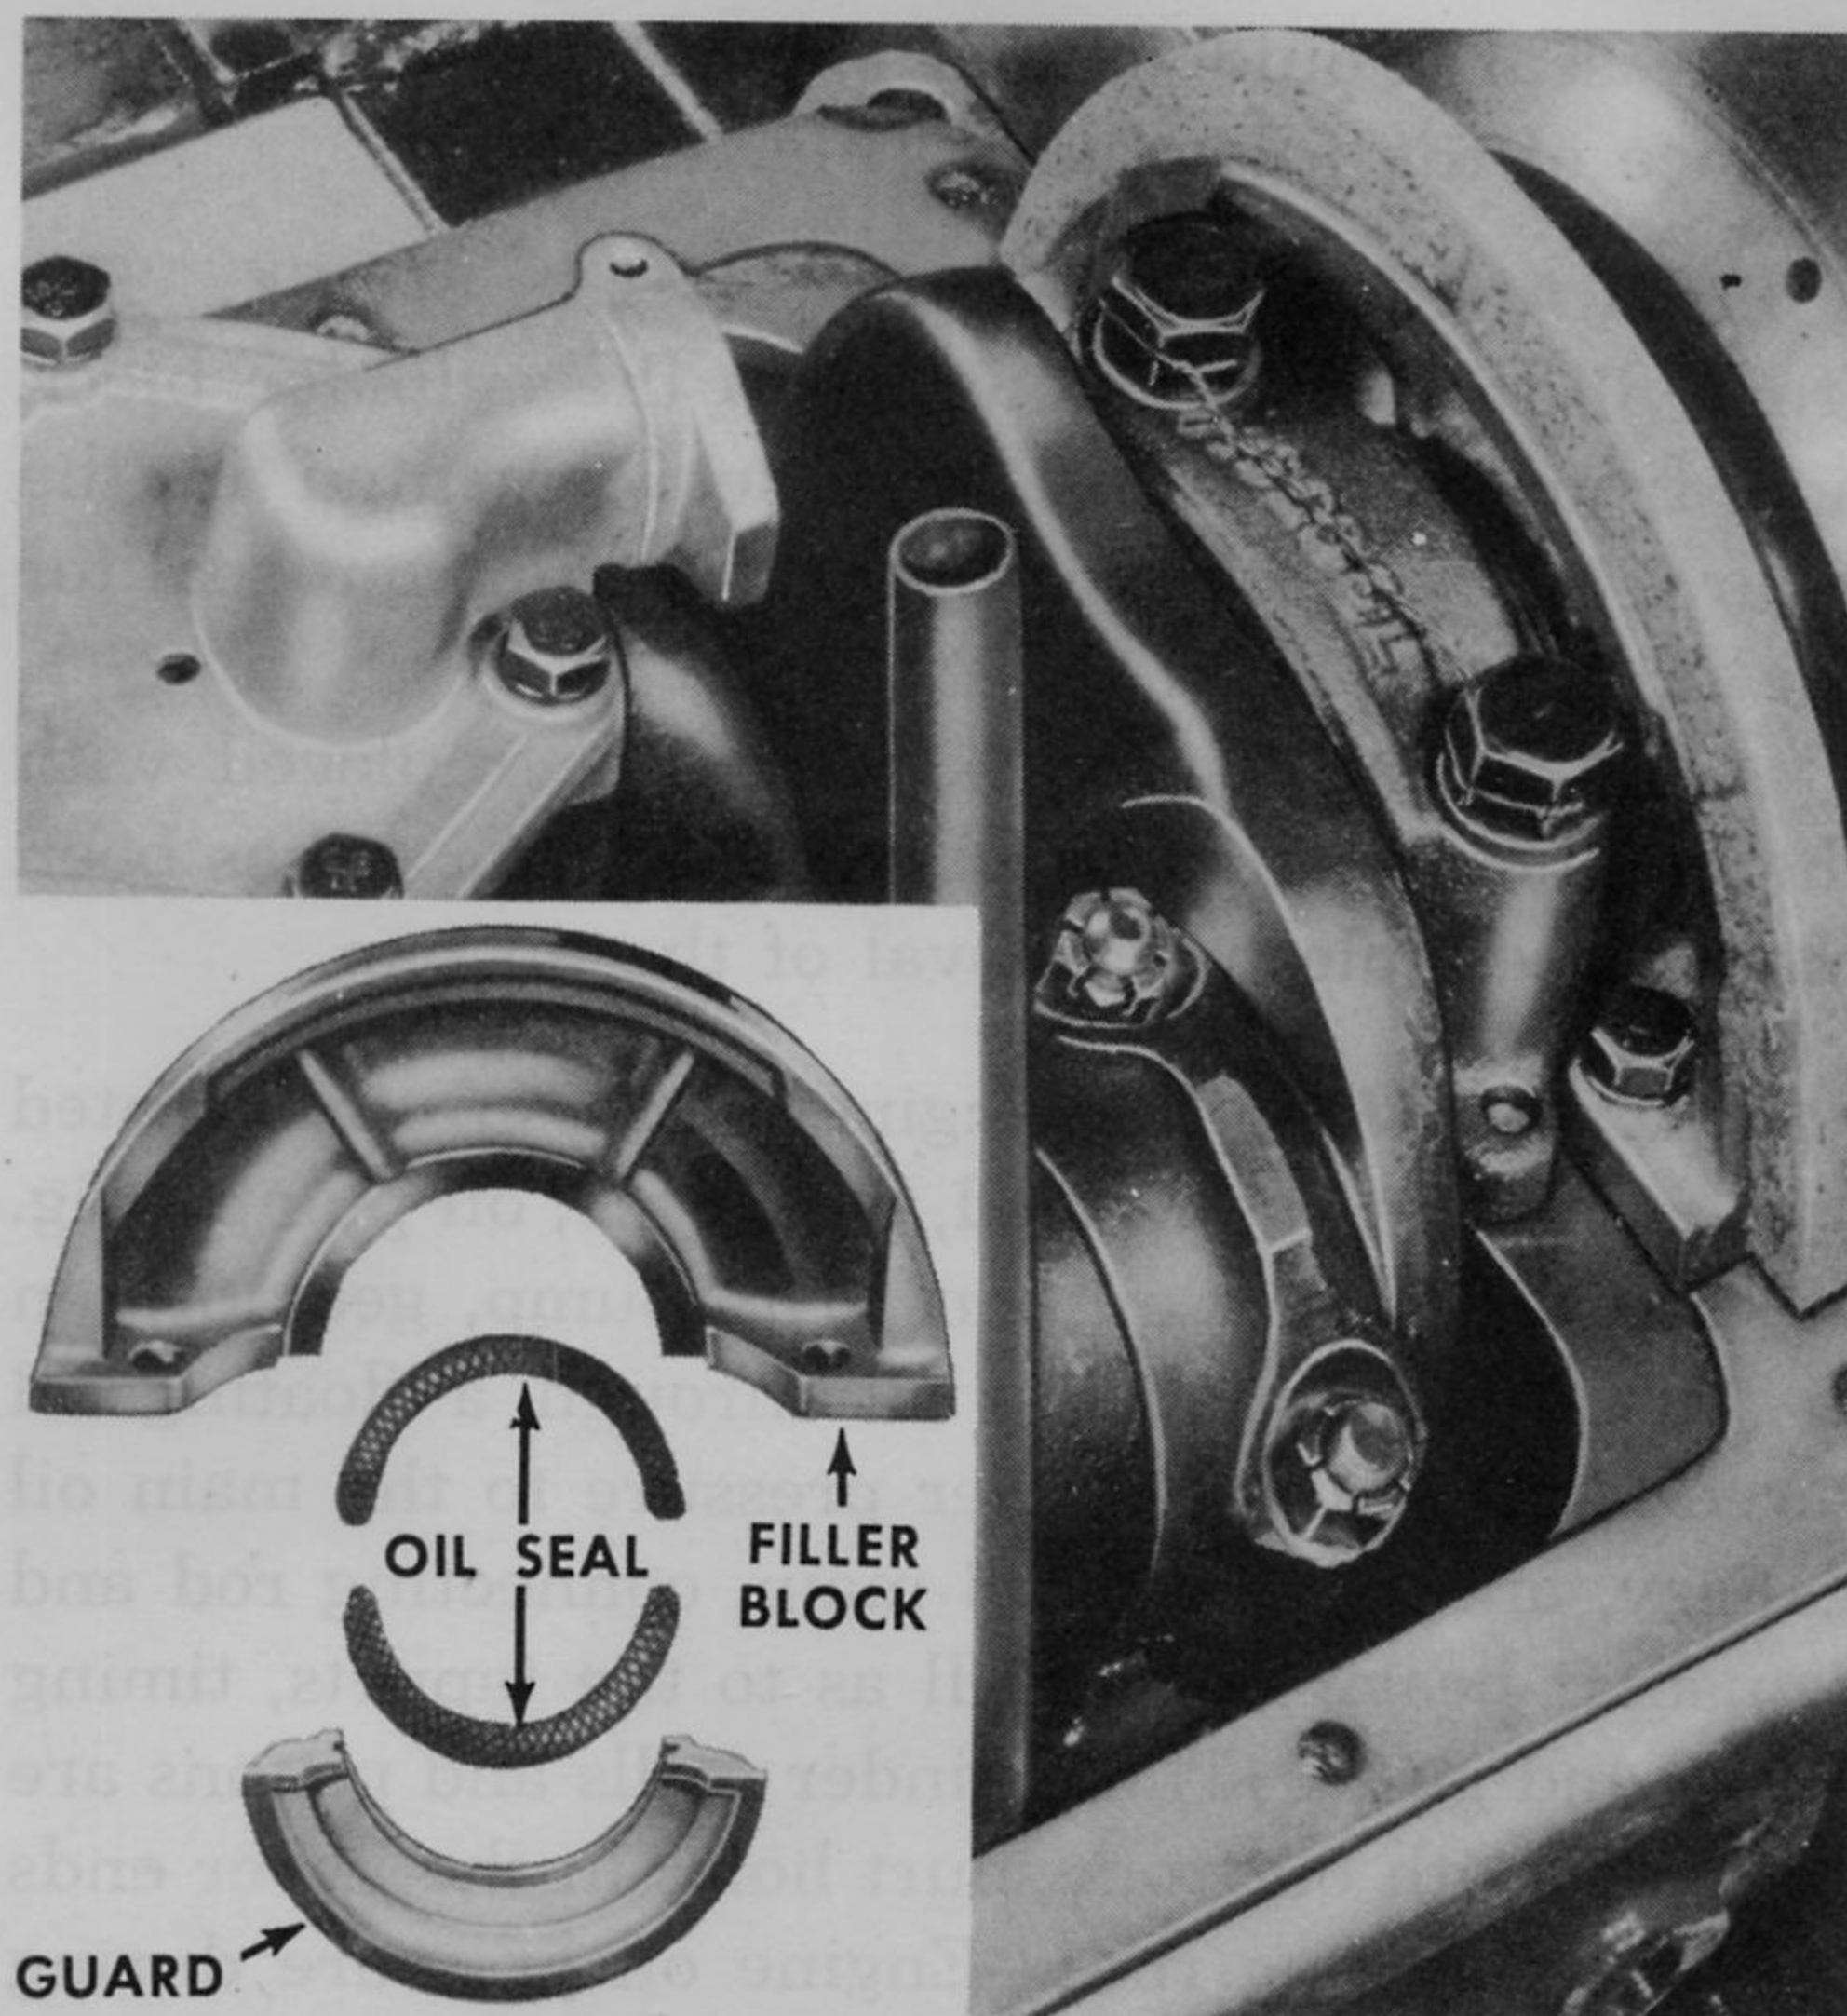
Crankshaft Rear Oil Seal and Filler Block
